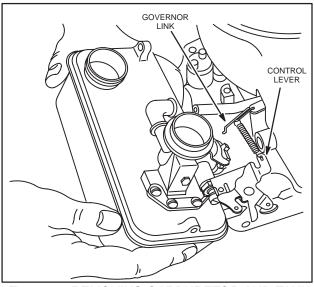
REMOVING CARBURETOR AND TANK ASSEMBLY
